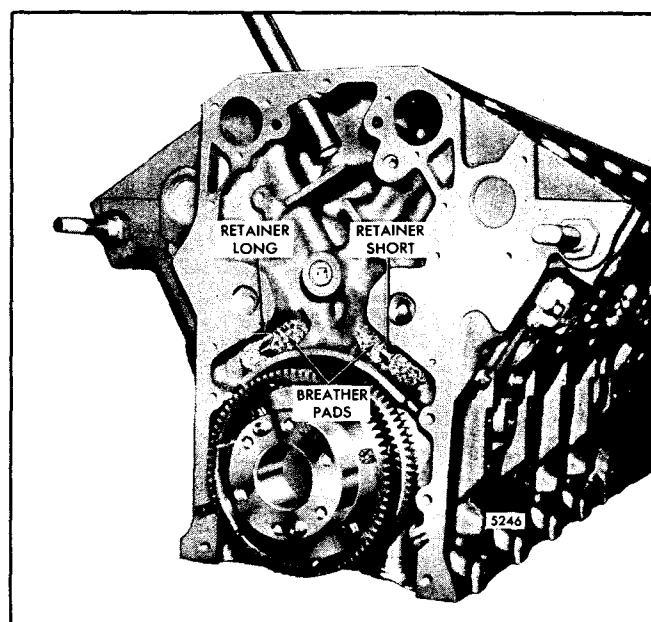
Breather Pads and Retainers Installed in Cylinder Block
